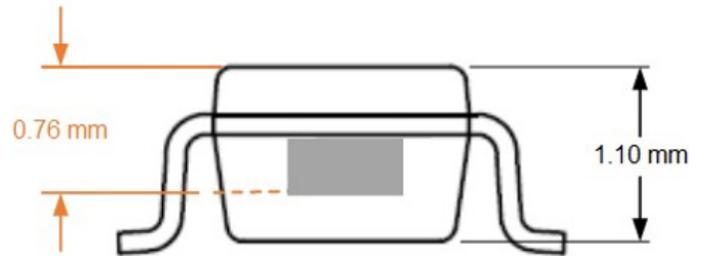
XtremeSense TMR Sensor Location in Z Dimension for CT220 in SOT23-5 Package
